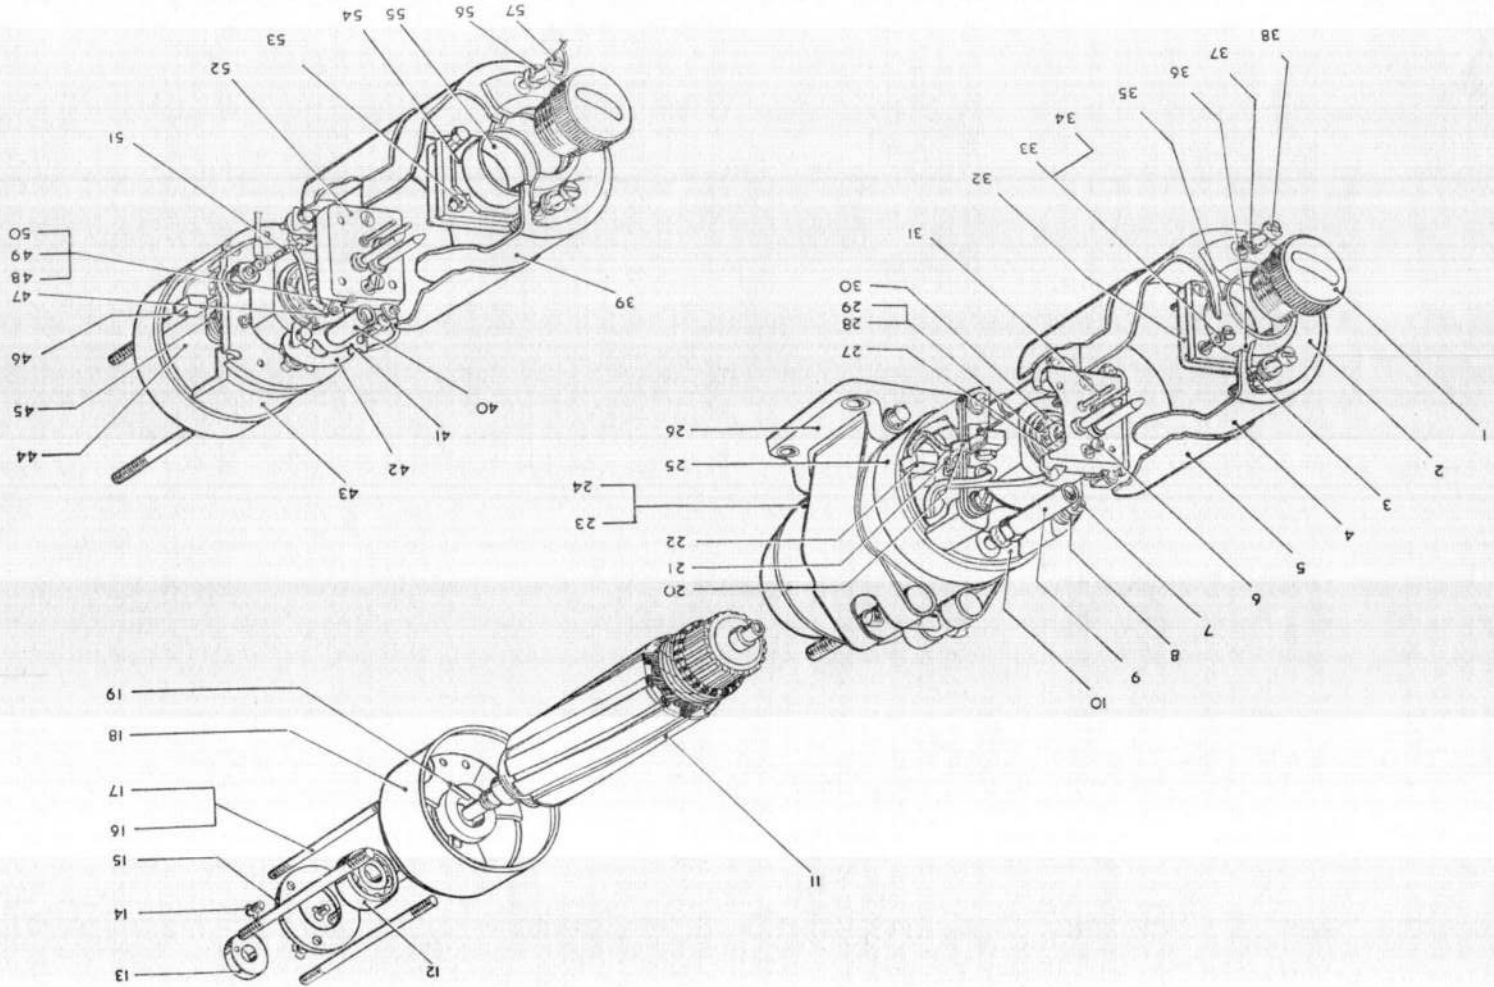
Exploded view of motors, Type CZ26817 and CZ74585
